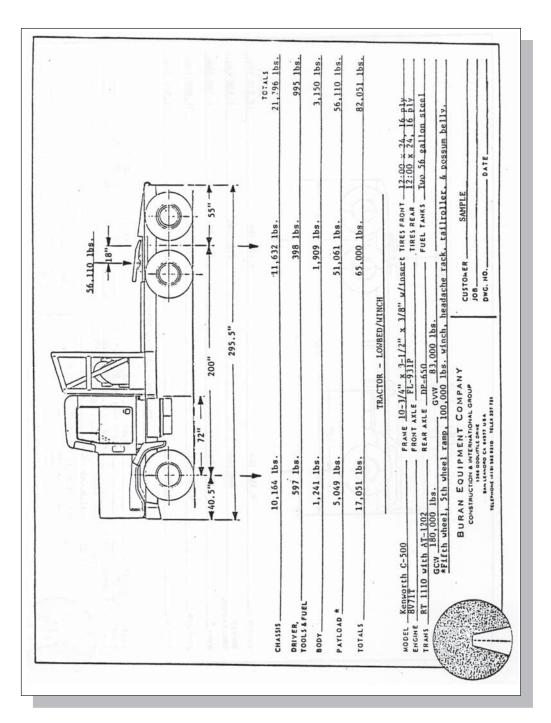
Tractor — Lowbed/Winch Sample
